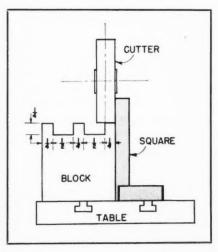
Milling cutter is lined up with square to cut slots in steel block.
